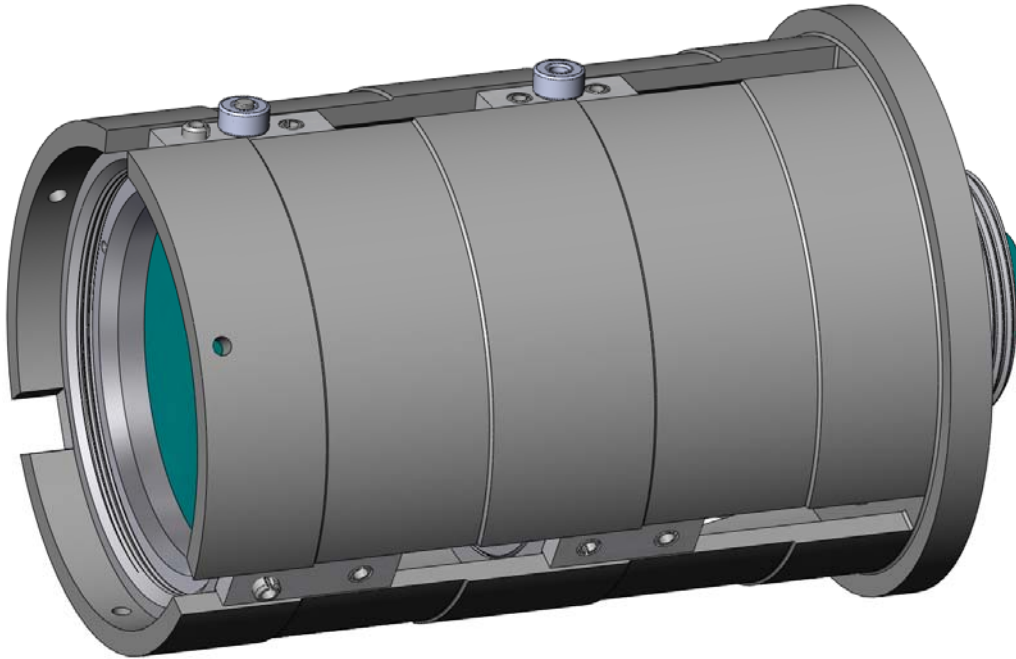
Rendering of mount/housing assembly in prototype 3.4.
